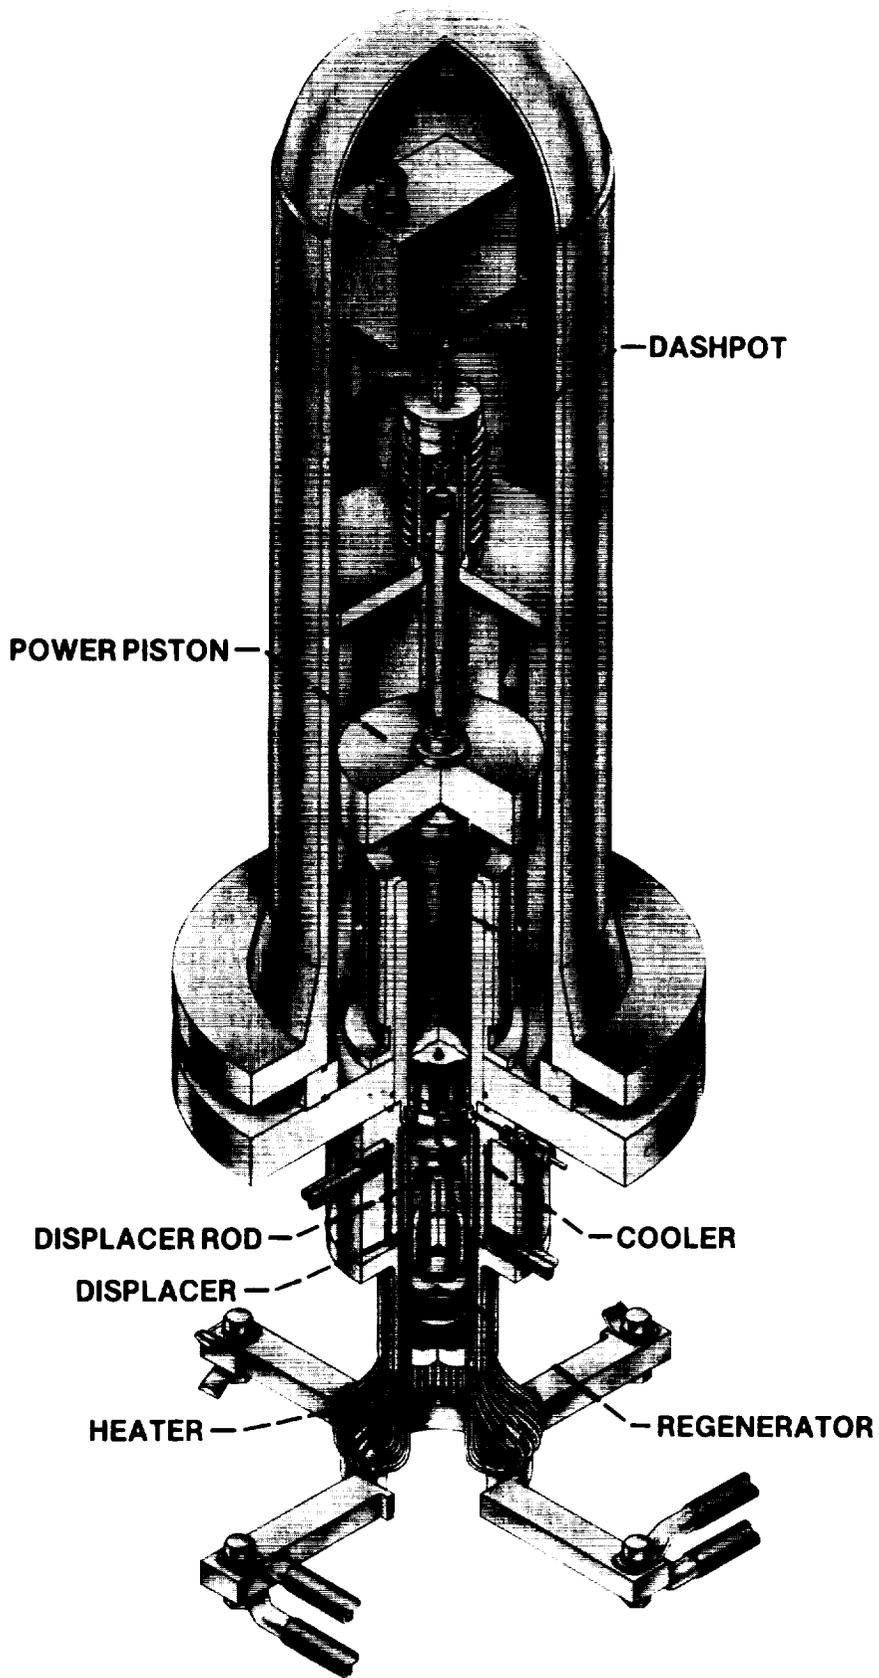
DRAWING OF RE-1000 ENGINE (8).
